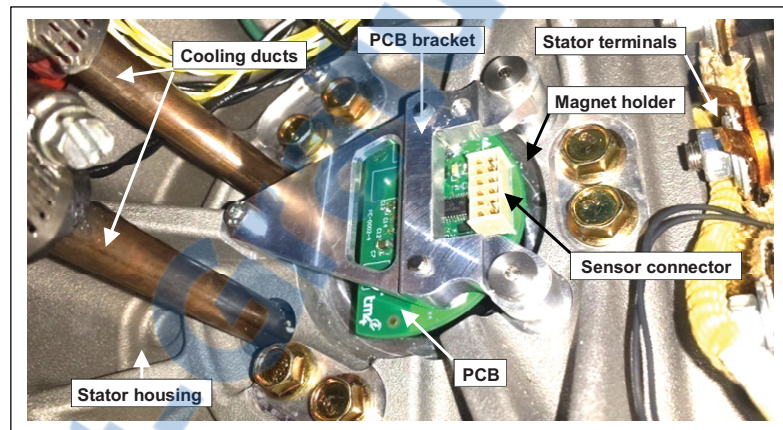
Mechanical mounting of the rotor-position-sensing prototype on the 80 kW PMSM. The PCB bracket, the magnet holder, and the PCB hosting the Hall-effect IC sensor are shown in this photograph
